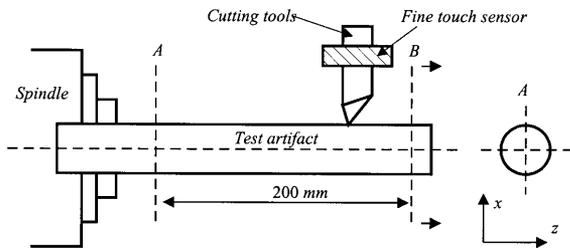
Diagram of the geometric error measurement of the workpiece using FTS_Q.
